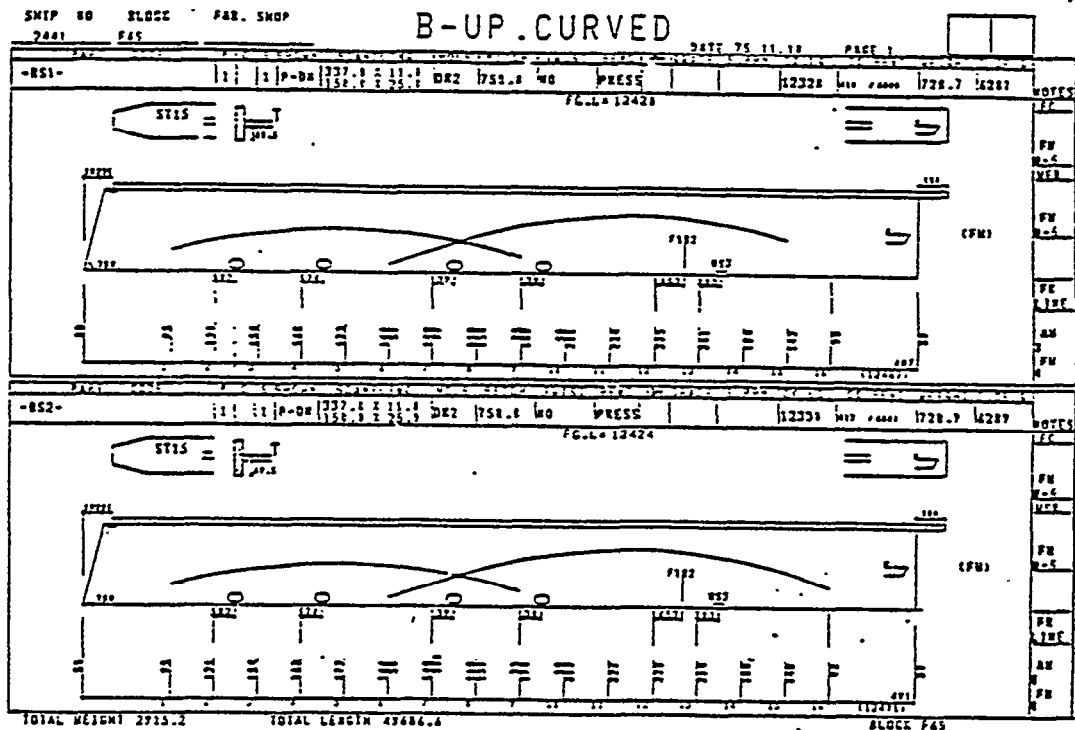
Part Dimension Plan of Curved Built-up Frame (by COM)
